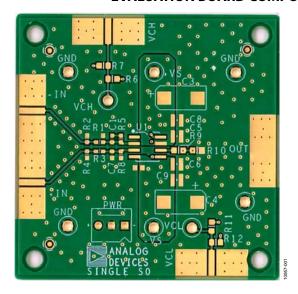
AD8036/AD8037 Evaluation Board Component Side
